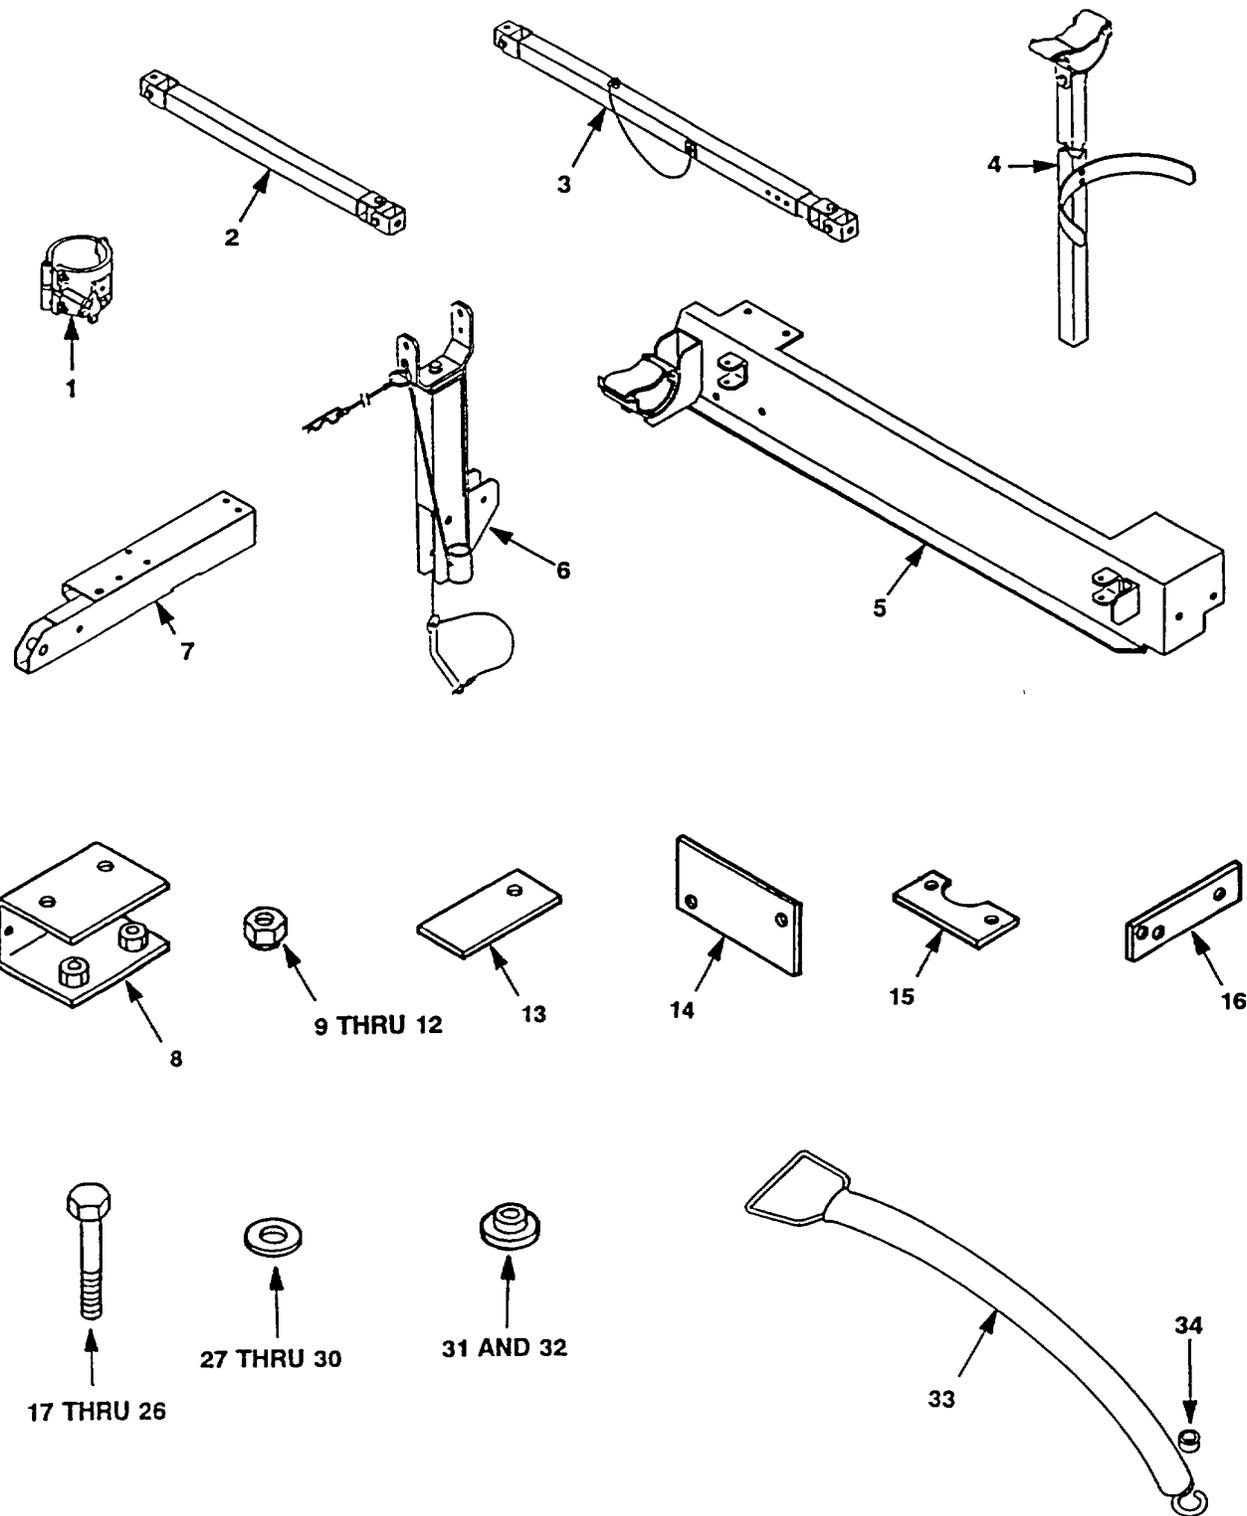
Universal HMMWV Mounting Kit Illustrated Parts
